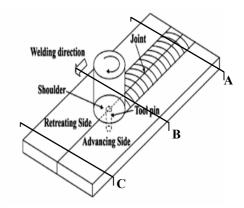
Schematic illustrations of the friction stir welding process [3].
